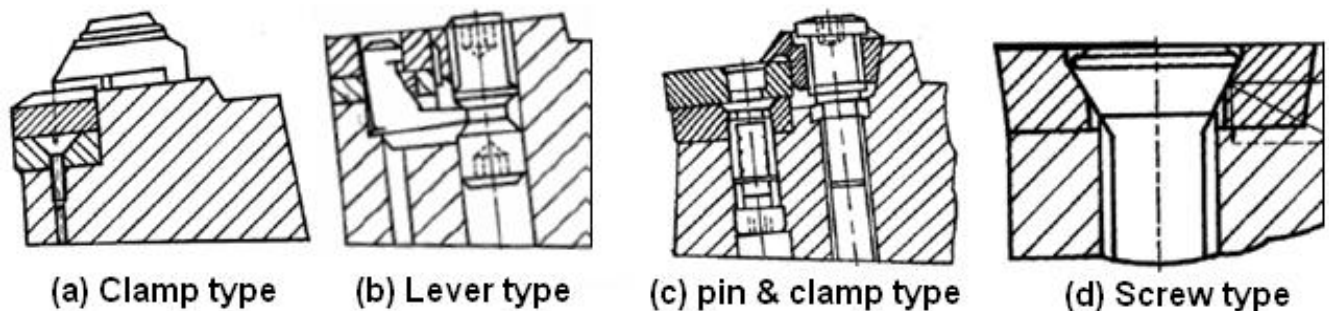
Mounting of tool inserts in tool holders by mechanical clamping
